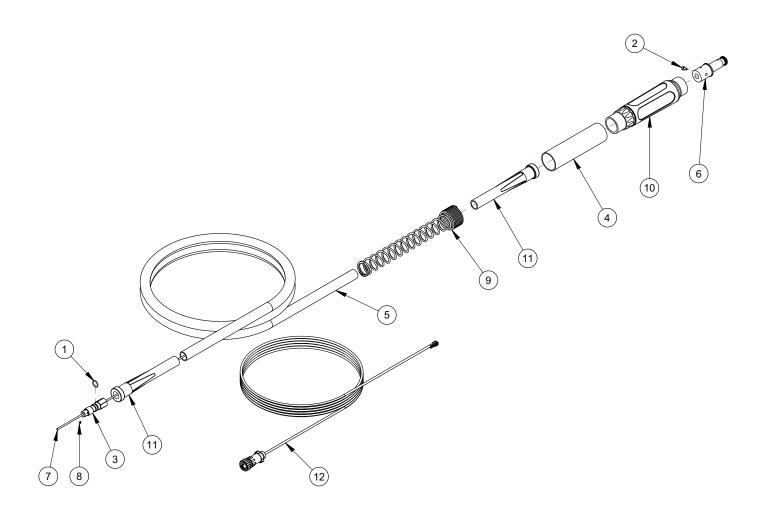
CONDUIT POWER ASSEMBLY FOR MIG 225 LINCOLN (P/N 85527)
